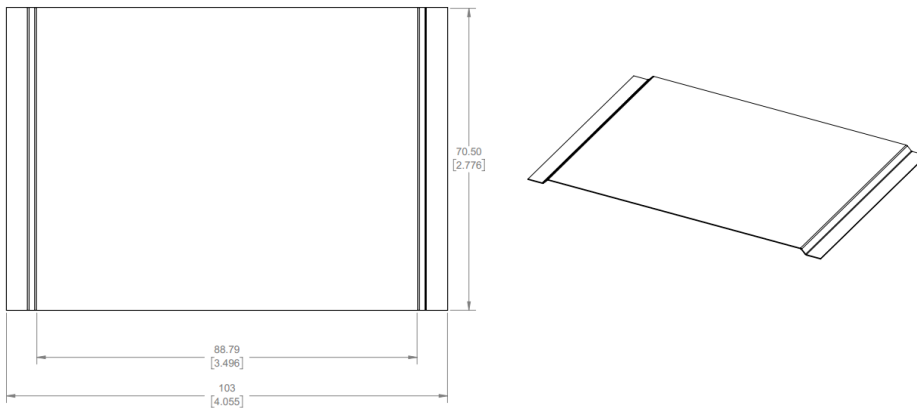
Small Card Bottom Side Insulator (Side View) TBD <need 2D drawings>
